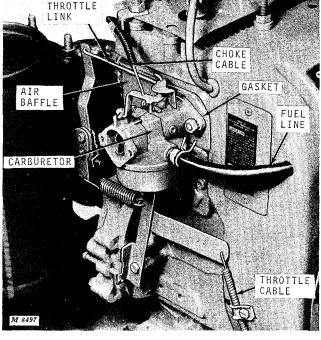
Installing Carburetor Assembly on Cylinder Block
